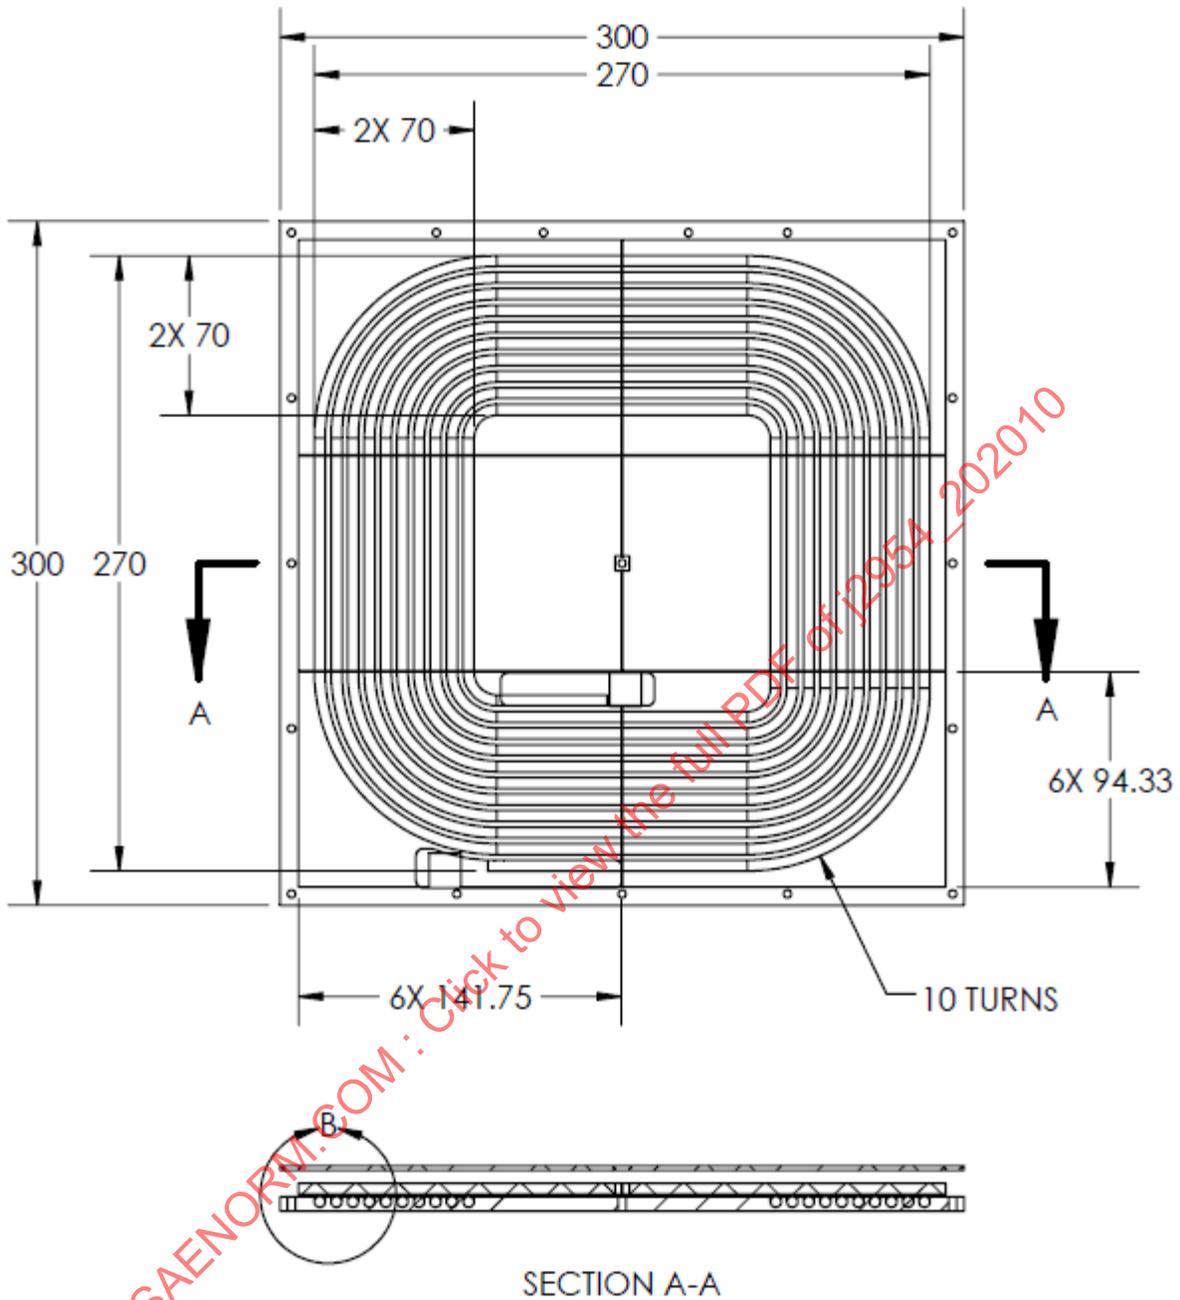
Mechanical dimensions of the Test Station VA WPT3/Z1
